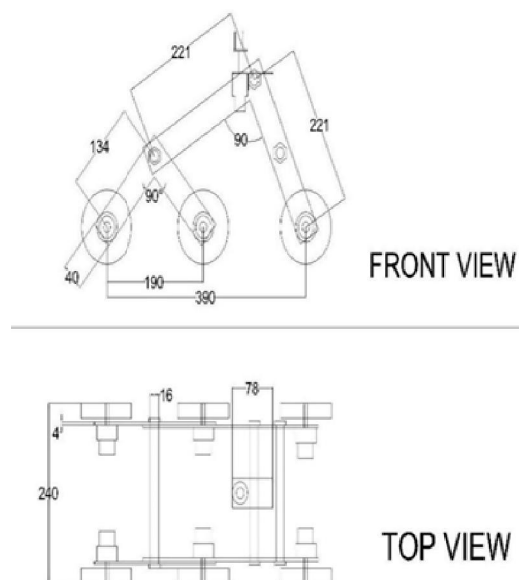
2D Drawing of Rocker Bogie Mechanism
